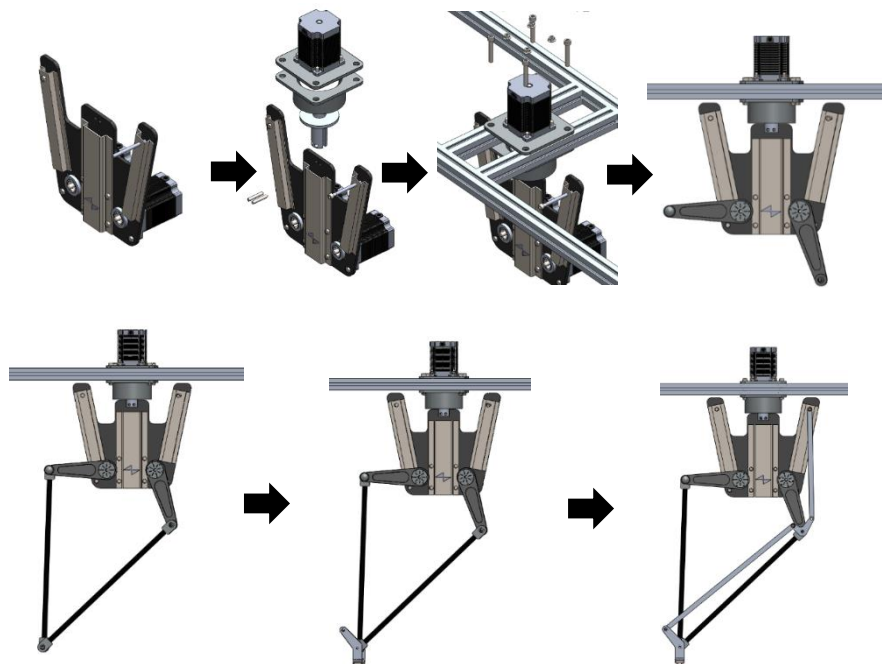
Step-by-Step Guide to the Assembly and Installation Process
